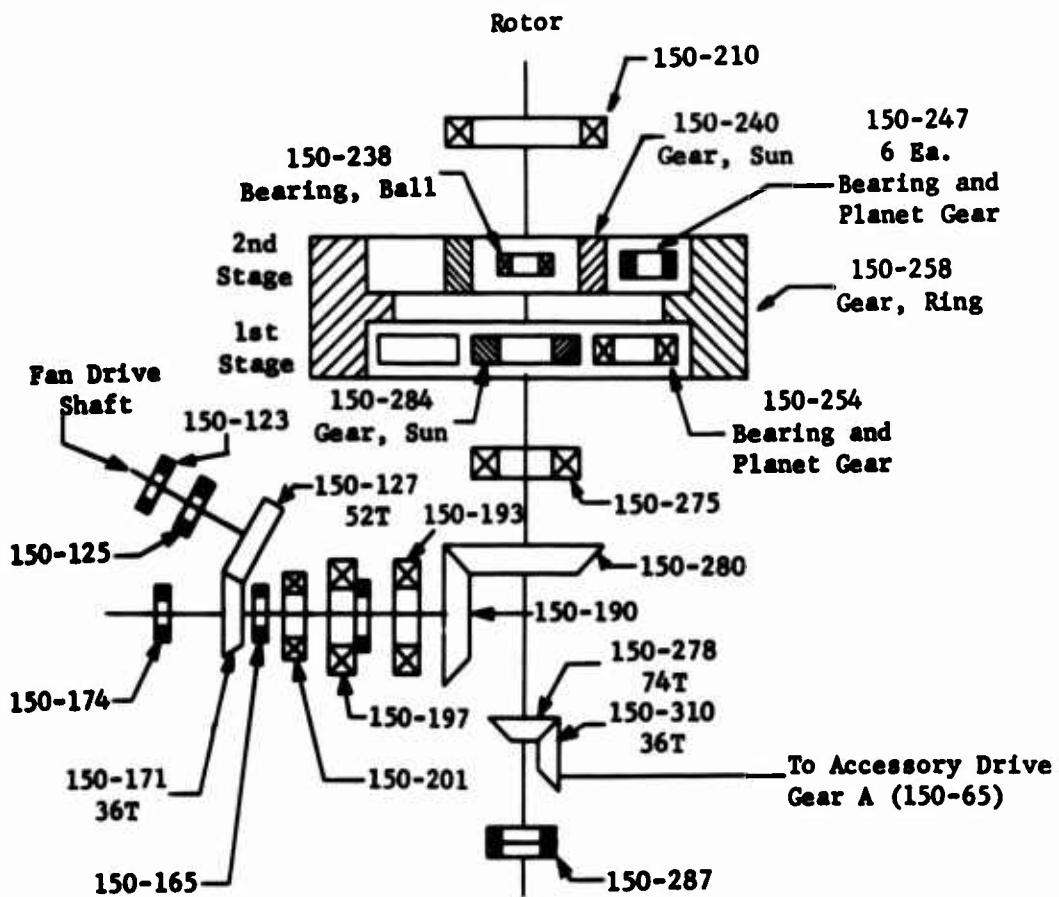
Gear and Bearing Arrangement - Engine 90° Transmissions and CH-47A/B Helicopter Combining Transmission.
